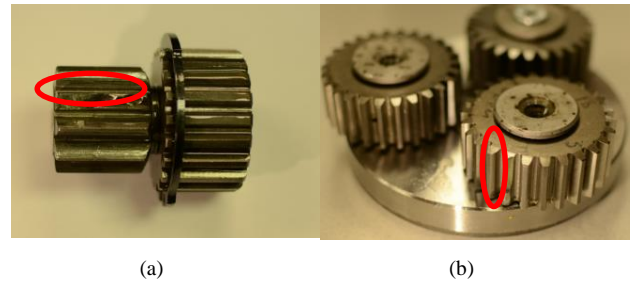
Illustrative images of PG faults (a) sun gear tooth damage (b) planet gear tooth damage
